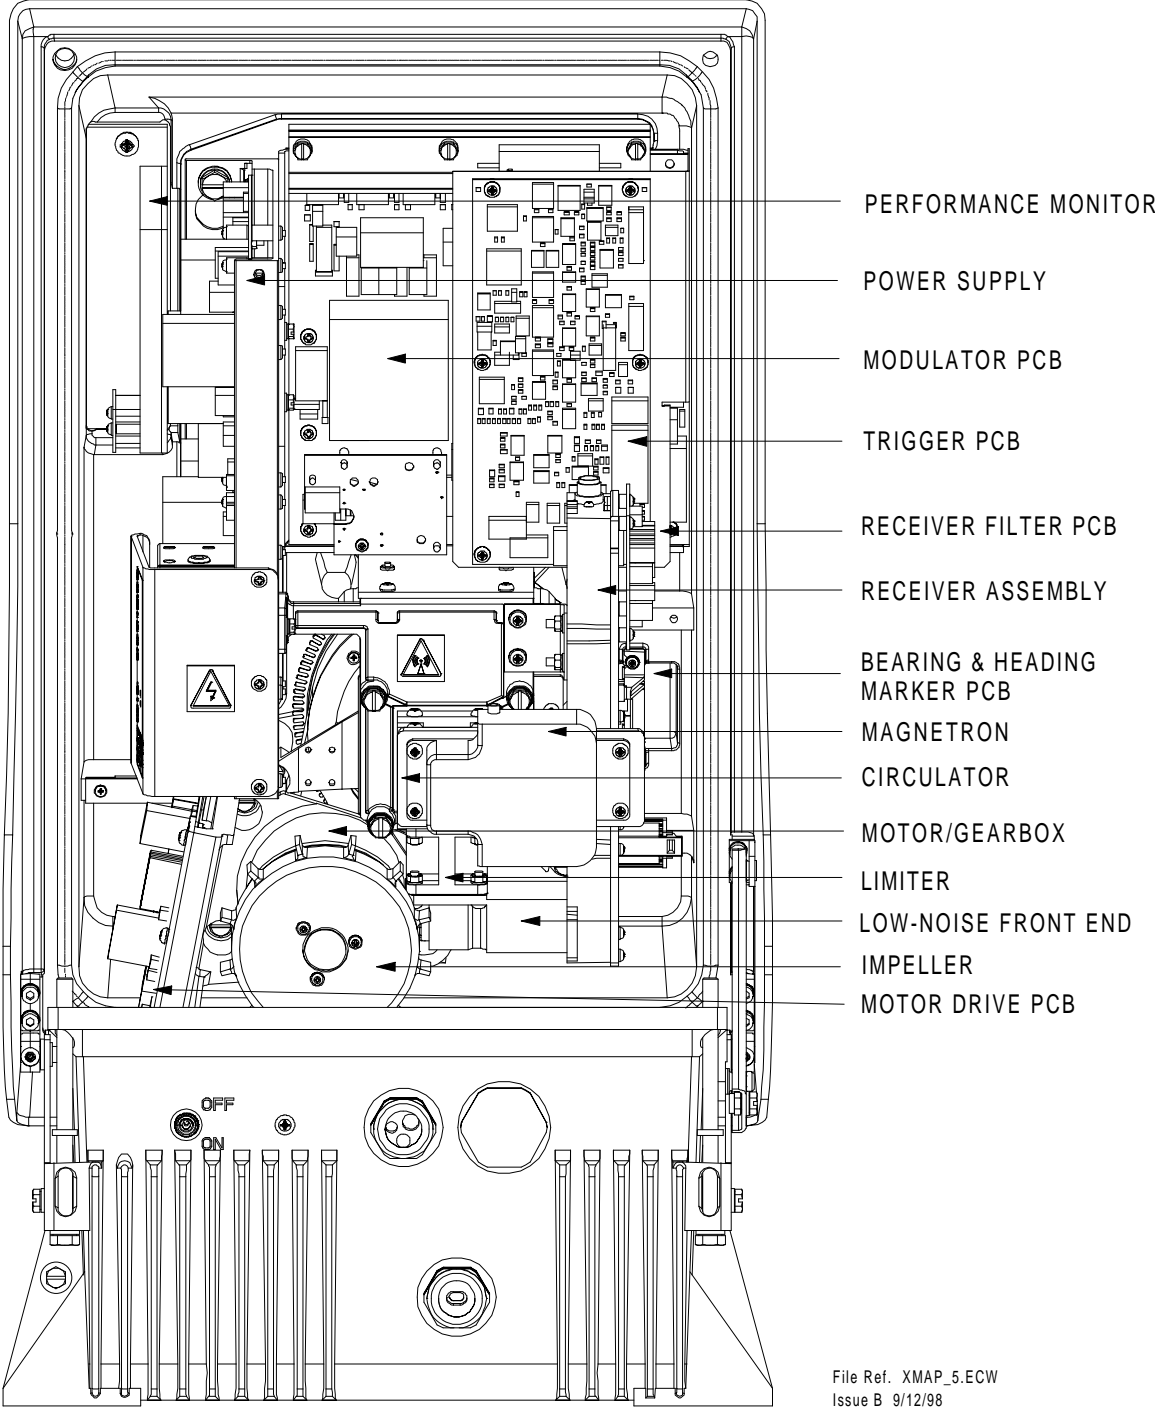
X-Band Masthead Turning Unit - View showing Main Assemblies
